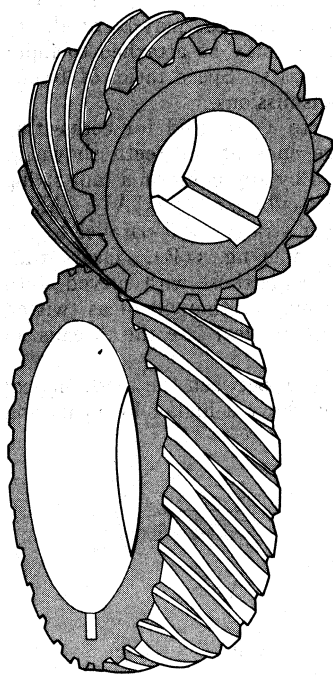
CROSSED-AXIS HELICAL GEARS
